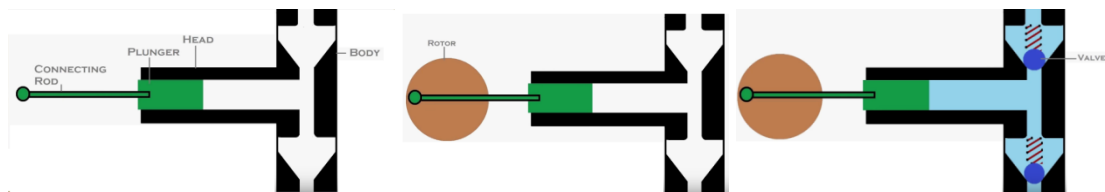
b: Parts of a piston/plunger pump
